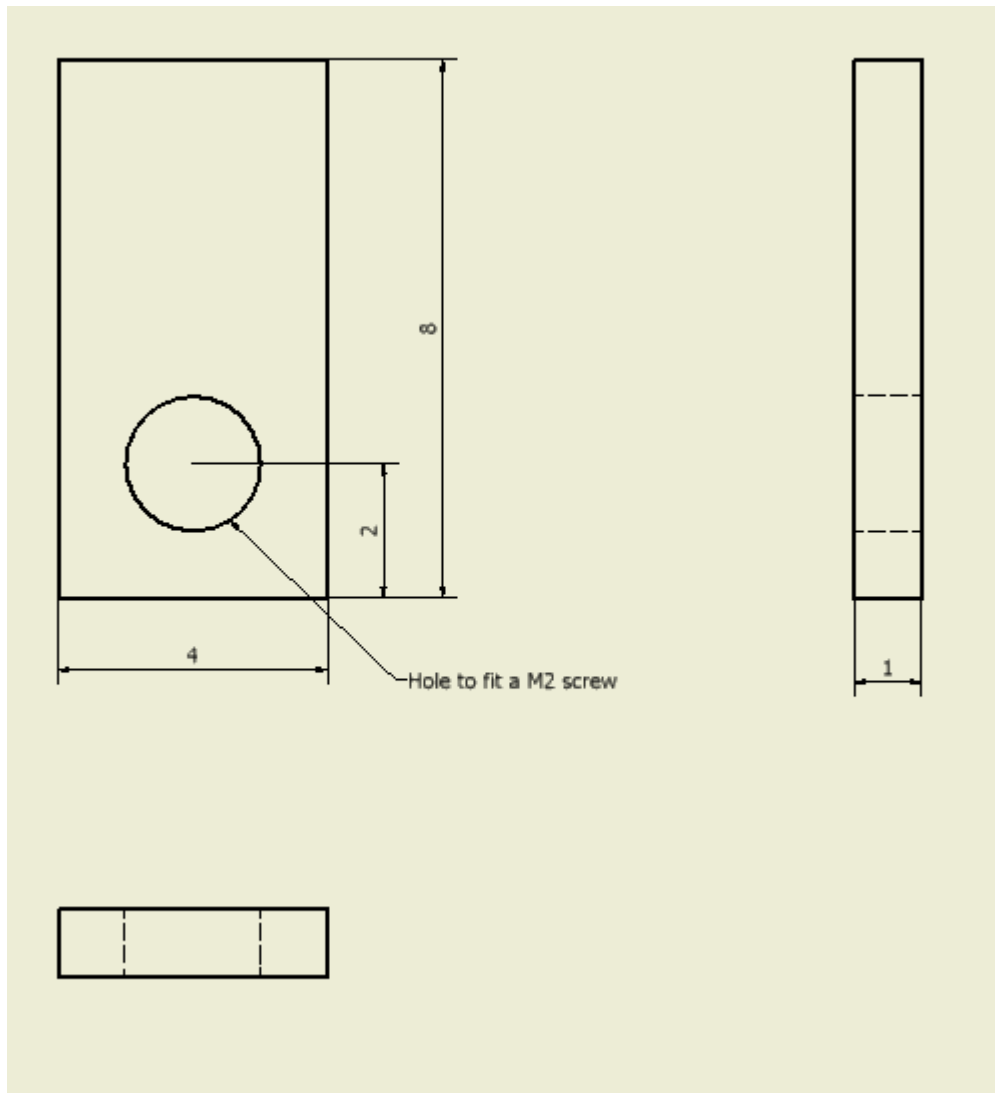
Drawing of the washers used to hold the glass plate in position.
